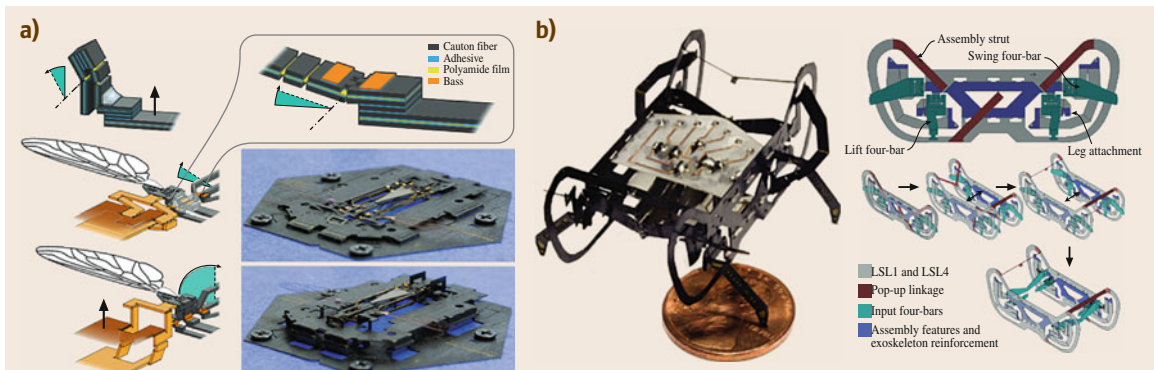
(a) Mobee, monolithic design of MFI [23.127], (b) HAMR-VP, a 1.27 g quadrupedal microrobot manufactured using the PC-MEMS and pop-up assembly techniques (after [23.16])
